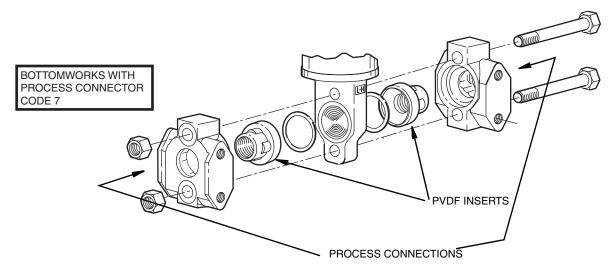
Replacing the Sensor Assembly (pvdf Inserts)
